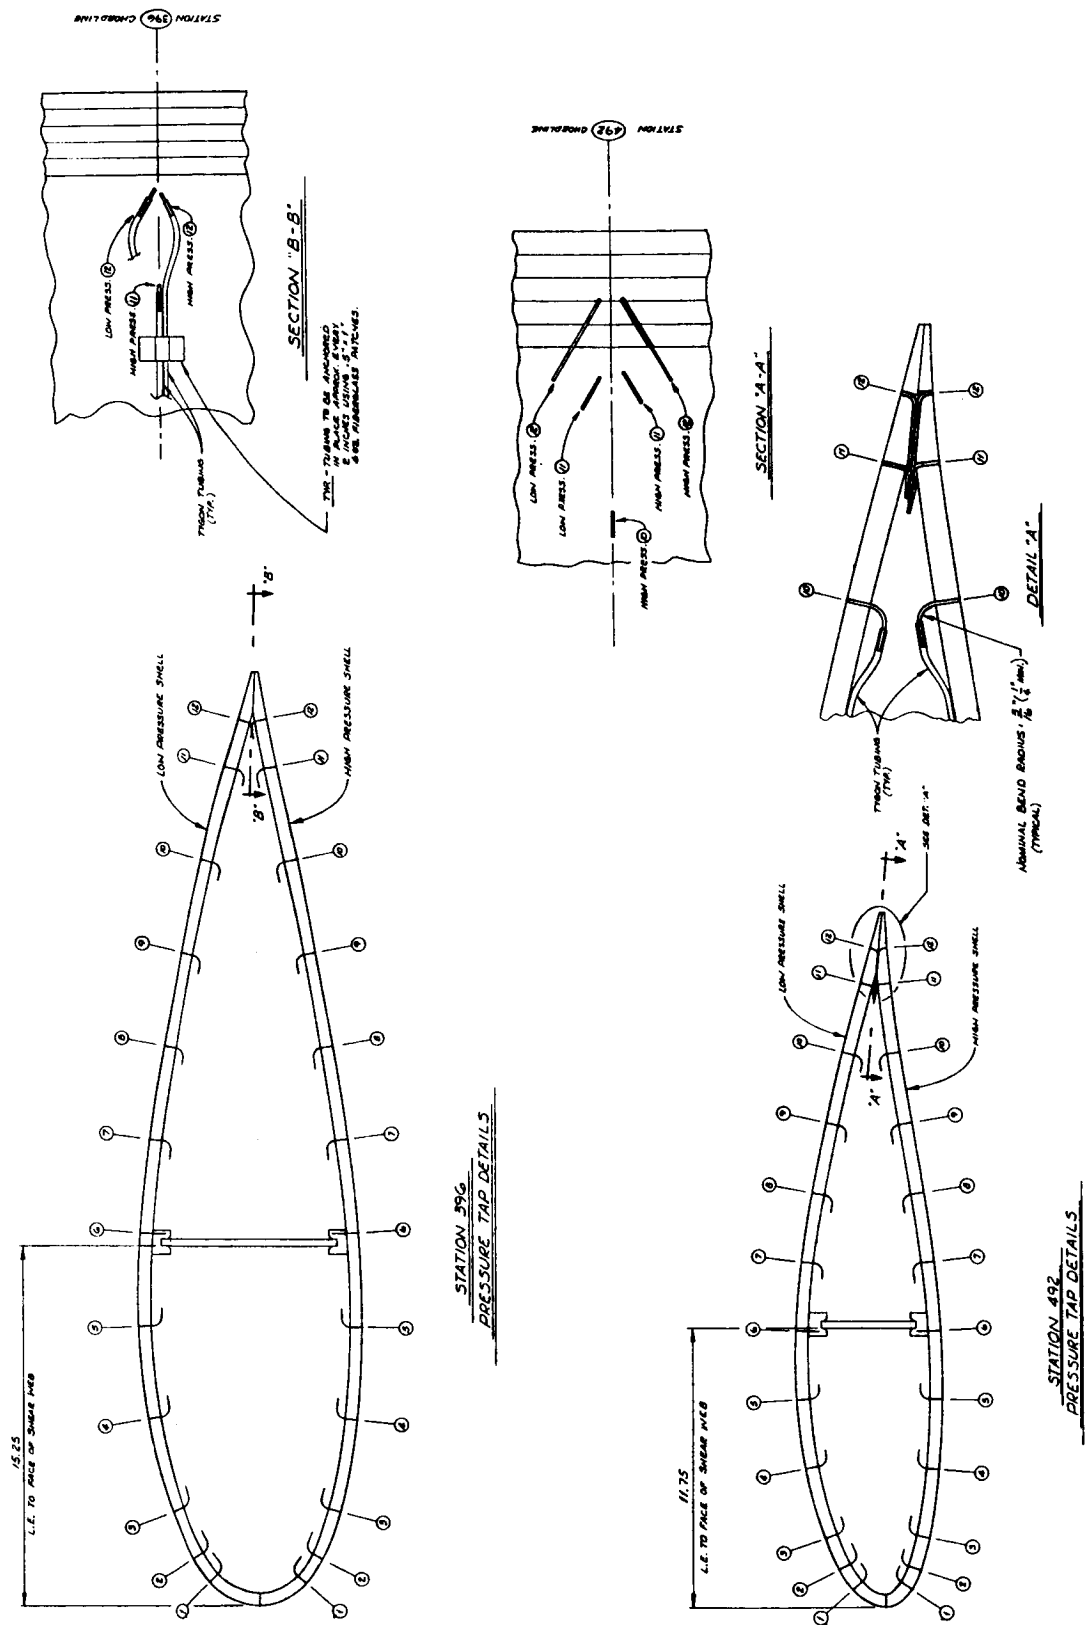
Pressure Tap Arrangement, Two Typical Sections
